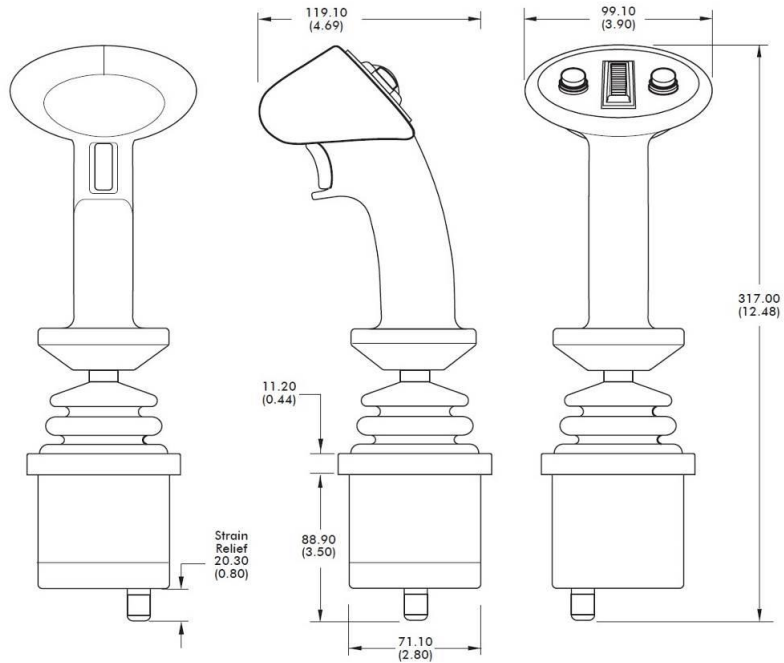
Dimensions of the SPR Joystick Controller used for testing. Units in millimeters (mm) (inches) [10].
